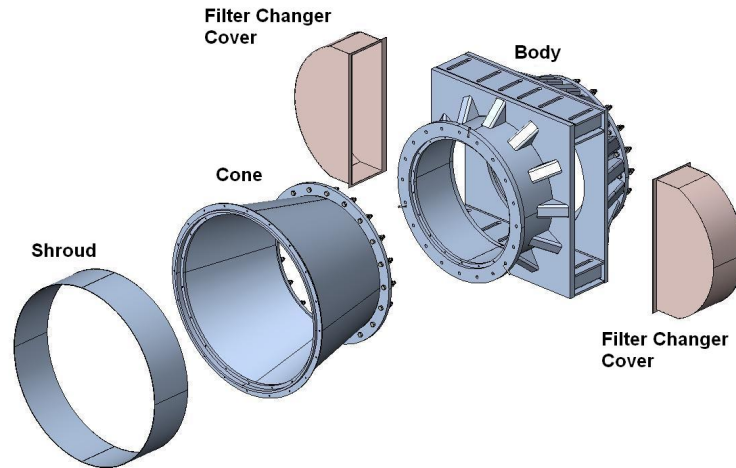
Exploded view of the component parts of the barrel<sup>[27]</sup>. Far left is the shroud followed by the cone then body. Covers for the filter chamber flank the body of the barrel.
